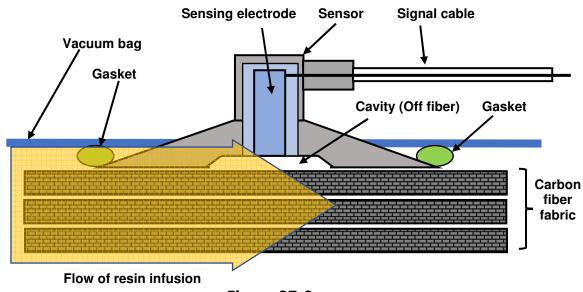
Cross-section of shaped sensor in vacuum bag during RTM or VARTM resin infusion
